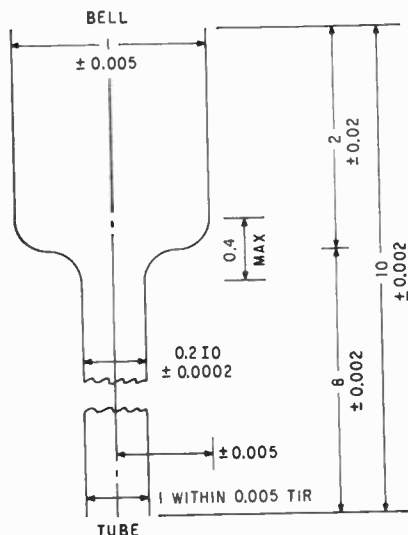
Typical twt dimensions, and tolerances, in inches
